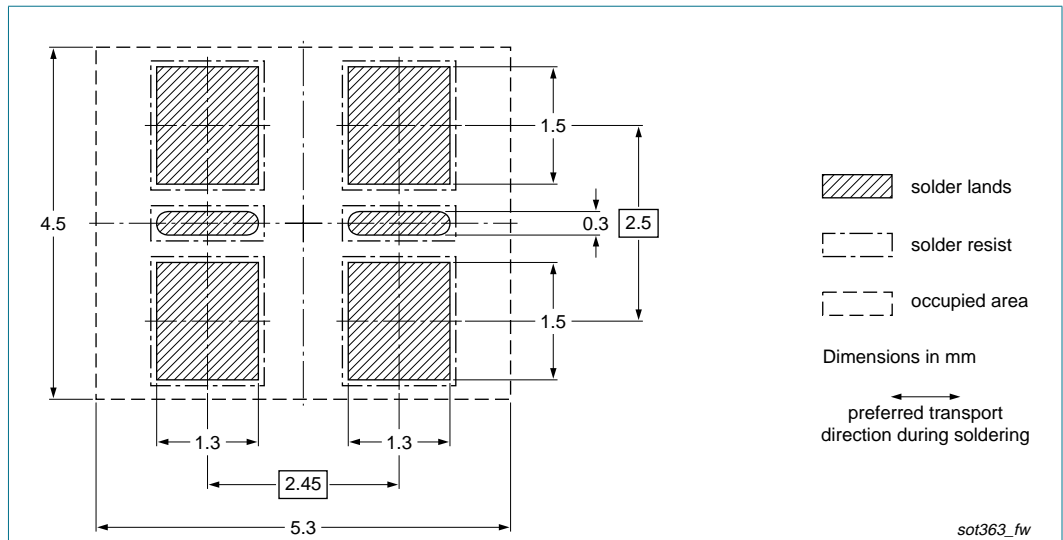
Wave soldering footprint BAS16VY (SOT363/SC-88)
